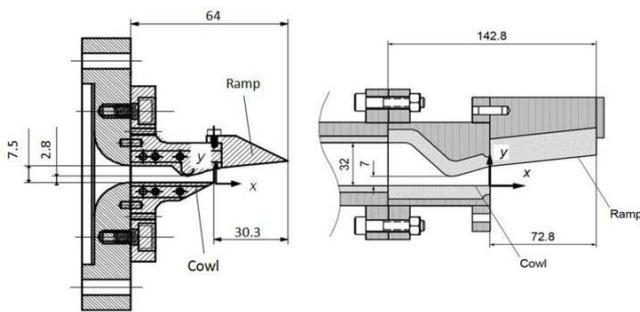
Schematic of Pre-Cooled Turbojet Engine.
